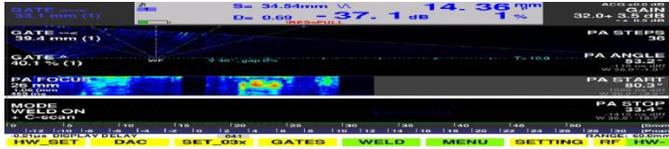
Ultrasonic phase array Defectogram of welded HE15 material Defect at 0.69mm depth
